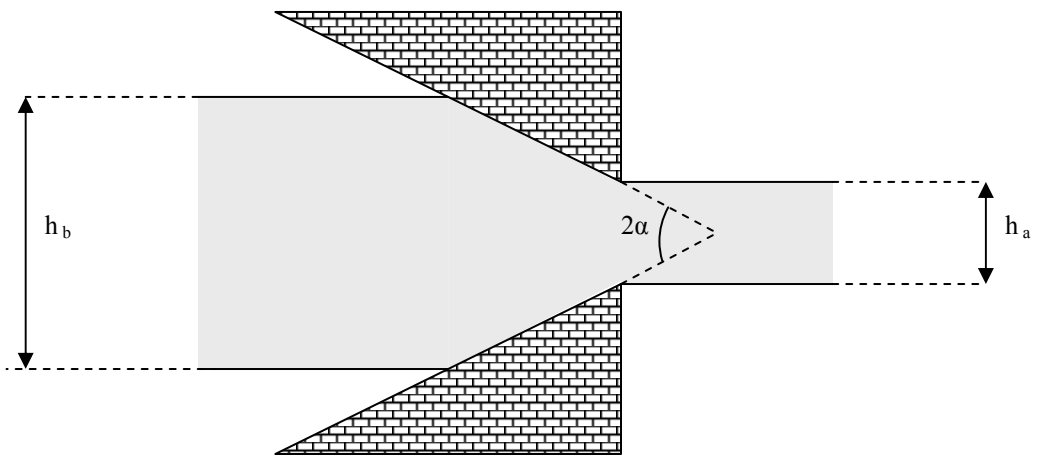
Schematic view of drawing of flat strip with wedge-shaped dies.
